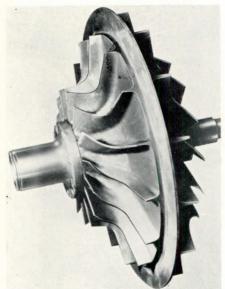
Small emergency gas turbine: combined compressor and turbine assembly
